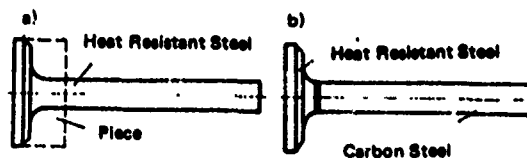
Production of valve: a - old method; b - friction welding.
